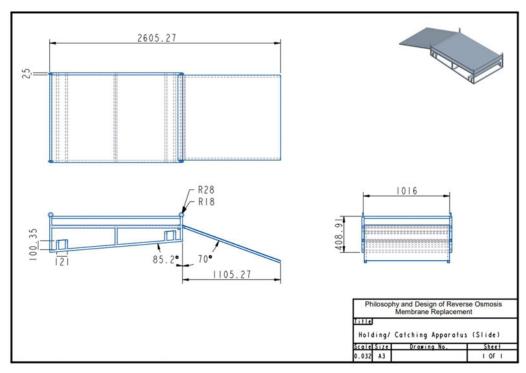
Engineering Drawing: Holding/ Catching Apparatus w/ Slide Attachment
